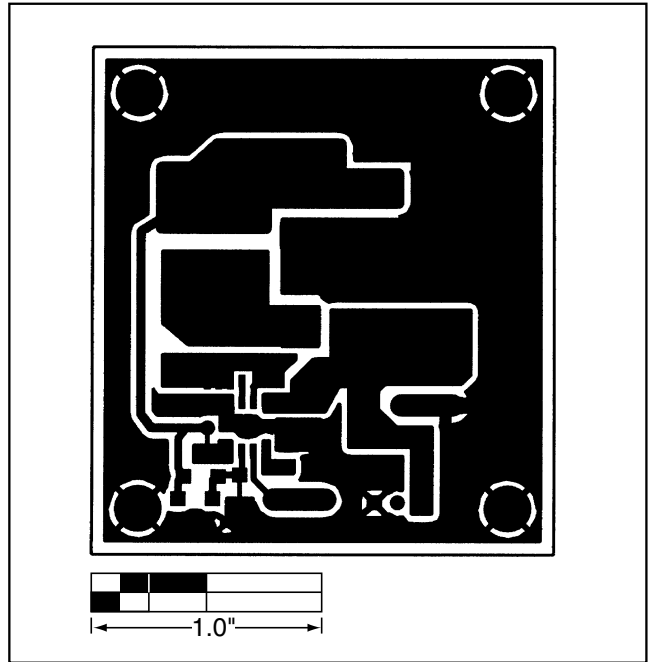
MAX1649 EV Kit PCB Layout—Component Side
